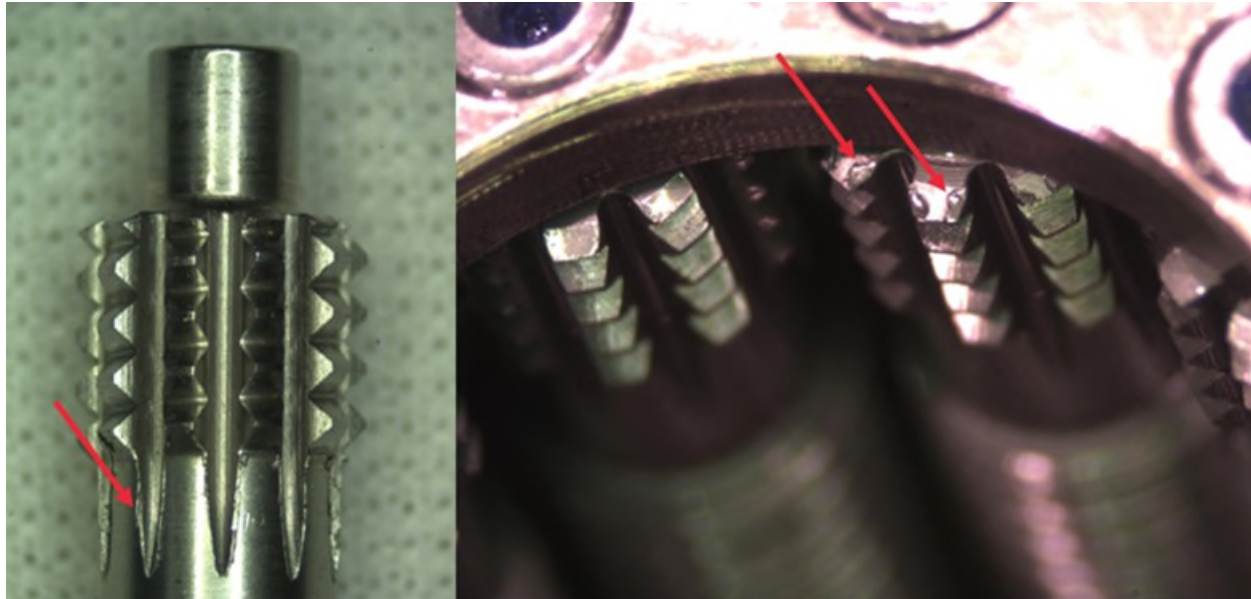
Left – planetary roller screw roller with burrs. Right – assembled PRS showing burrs on roller ends.
